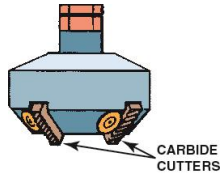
A cutter is used to remove metal and form the valve seat angles.
